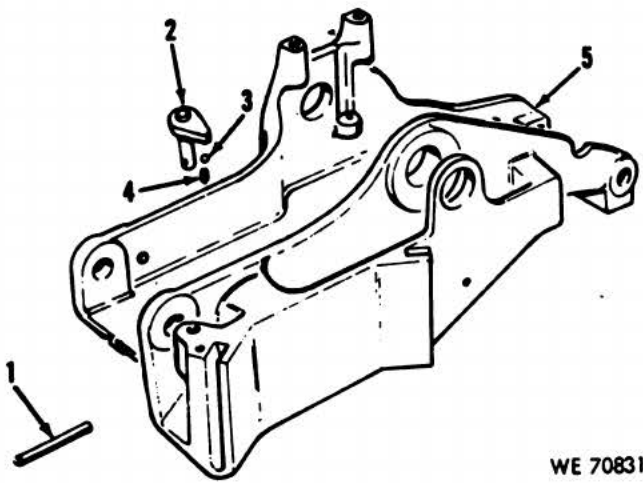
Side plate trigger group (for mount machine gun 7364875)—exploded view.
